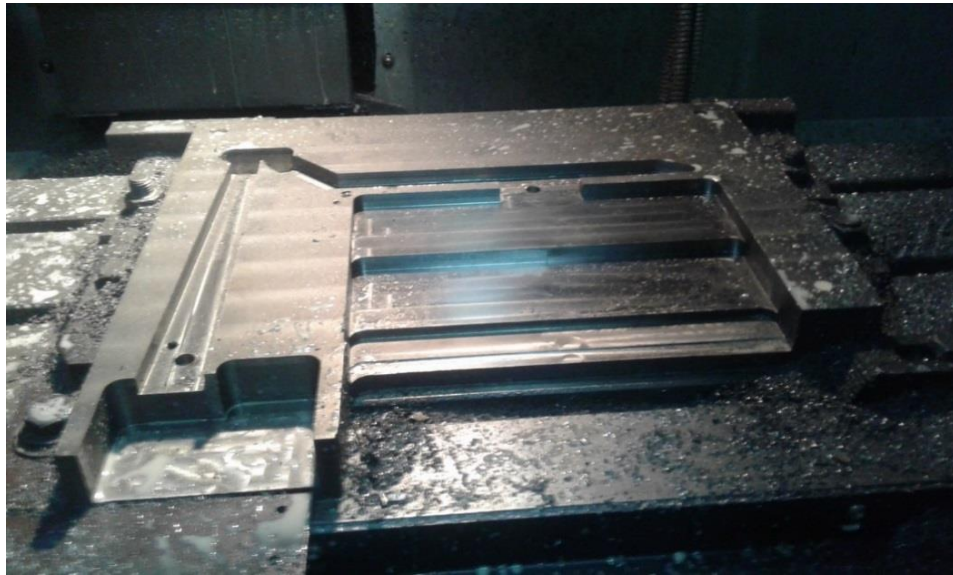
One half of the permanent mould inside the CNC milling machine.
